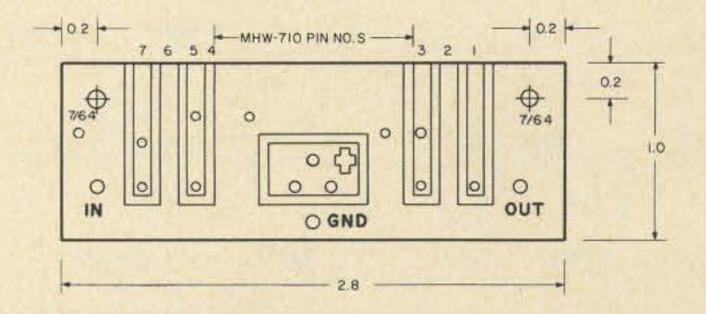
Heat sink drill guide. Heat sink is International Fig. 7. 10 Watt ATV amplifier PC board, foil side. All dimensions in inches. Board is glass.
